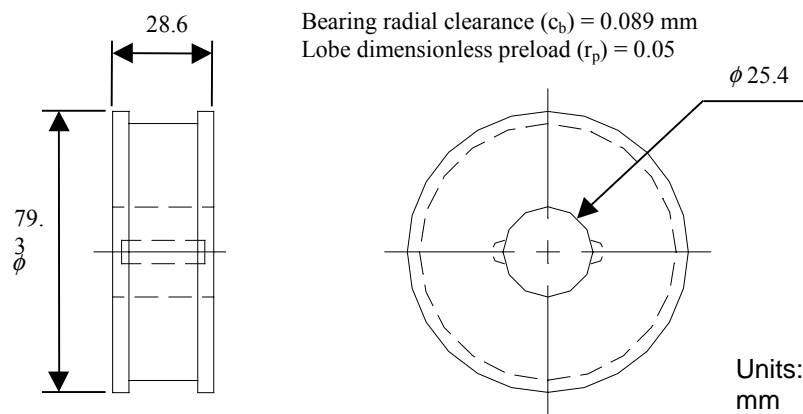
Two-lobe fluid film hydrodynamic bearings supporting test rotor
